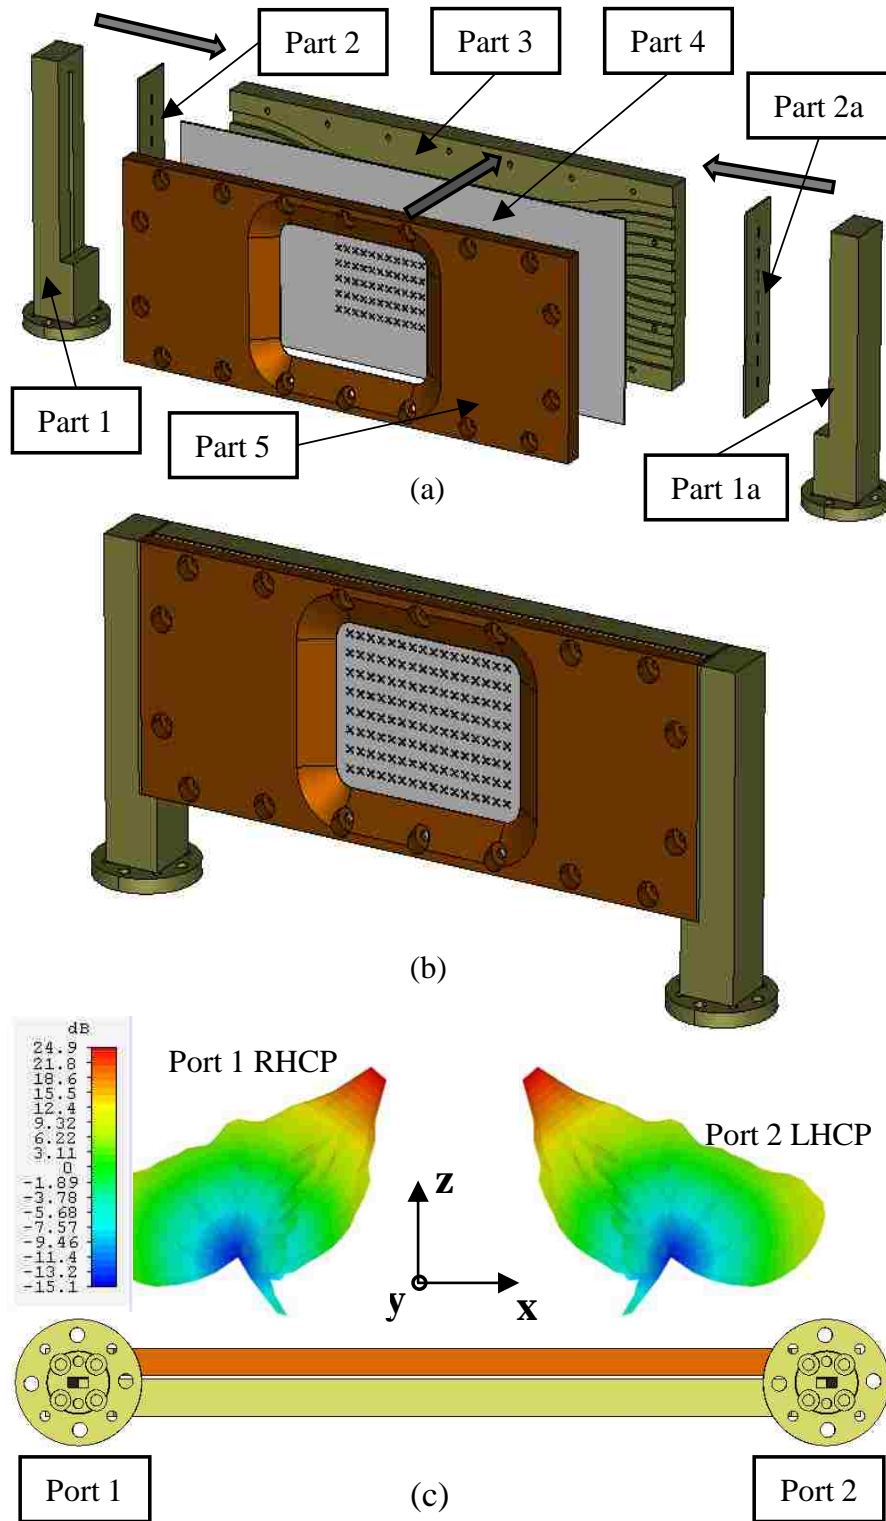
The full array design (a) disassembled, (b) assembled and (c) radiation pattern for each port.
